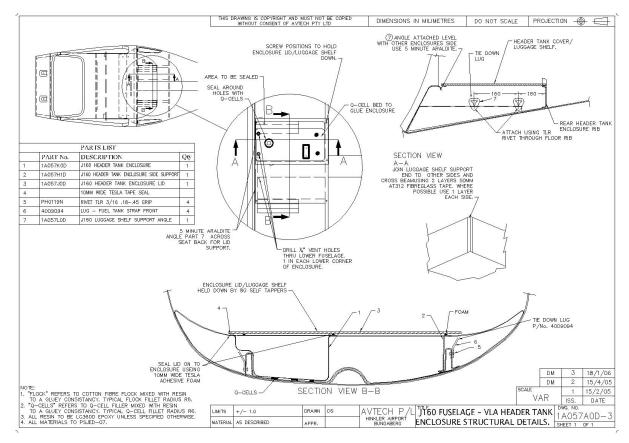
Header Tank Installation – Type 1 (all J-Series, n/a J120)
